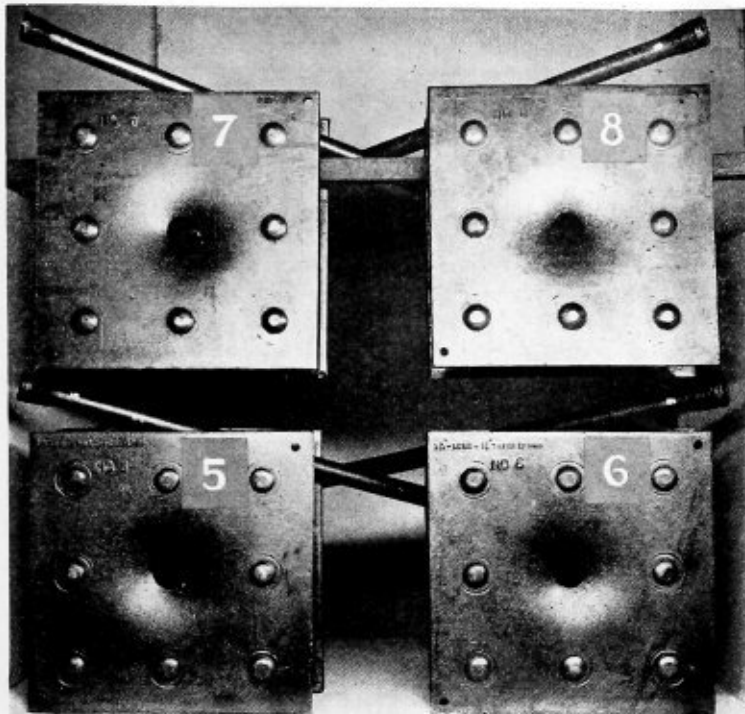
Tests on taper head crown stays—19/32-inch diameter at large end of taper
